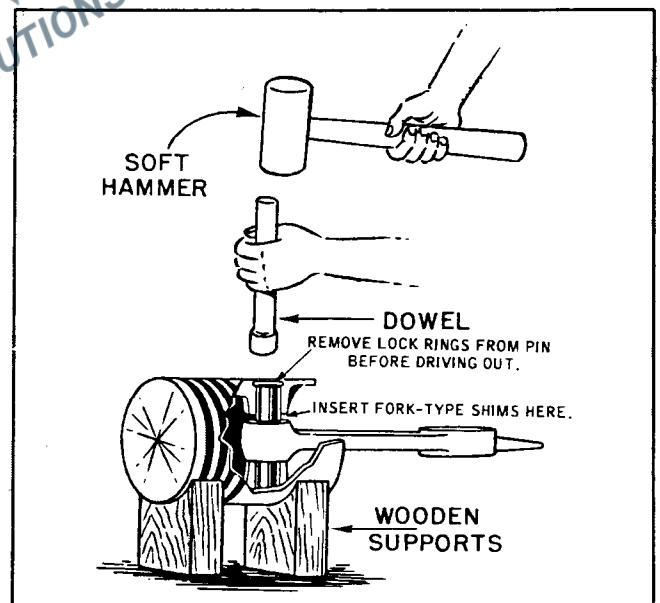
Recommended Method of Removing or Replacing Piston Pin.
